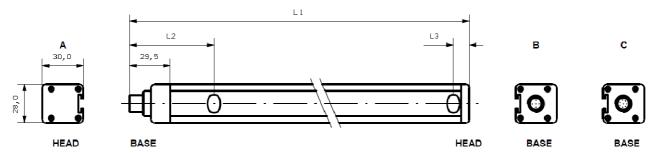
; Chap.:10. Dimensions of Standard, Base, Final models; view of the base and head with relevant connectors; see Tab.:1 and 3
